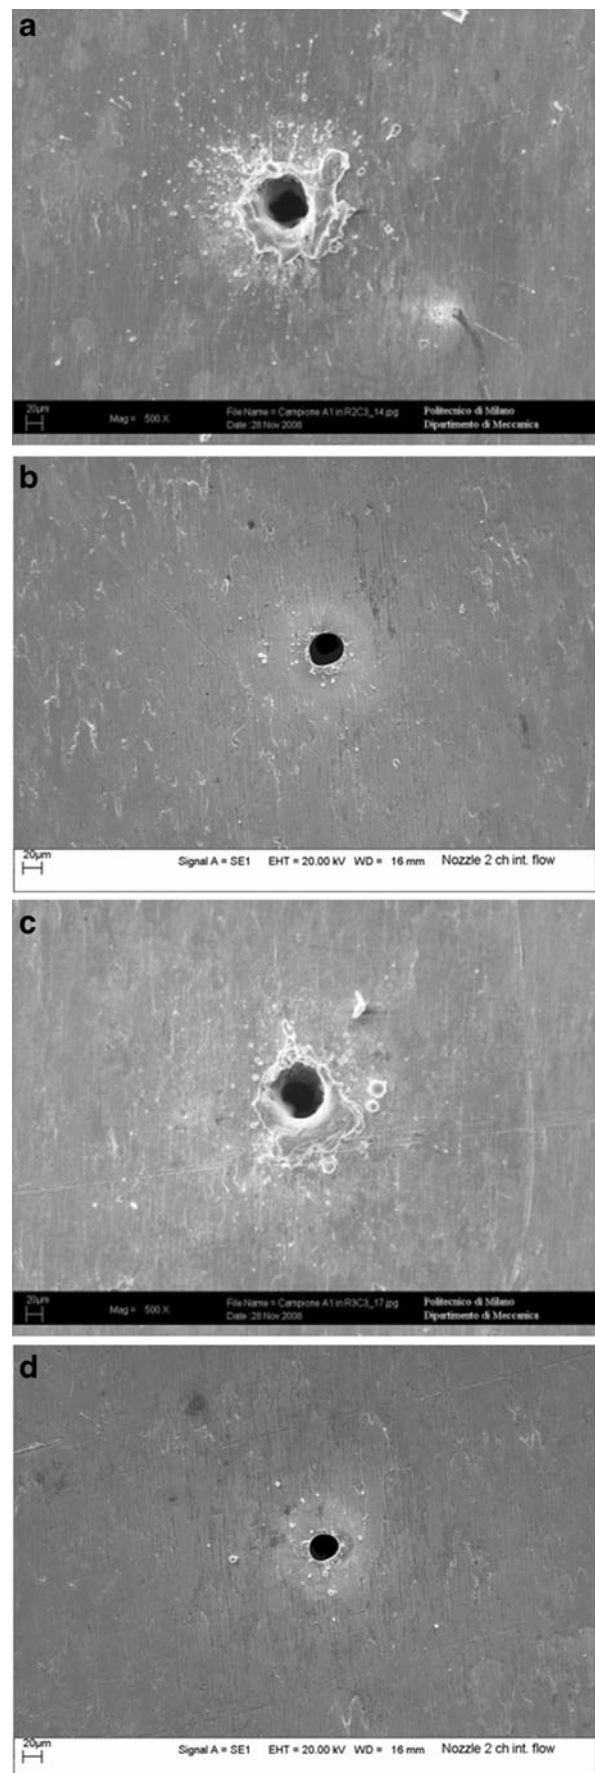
Representative images of the holes machined with the horizontal nozzle: entrance and exit surfaces, respectively, using helium (a–b) and argon (c–d)
